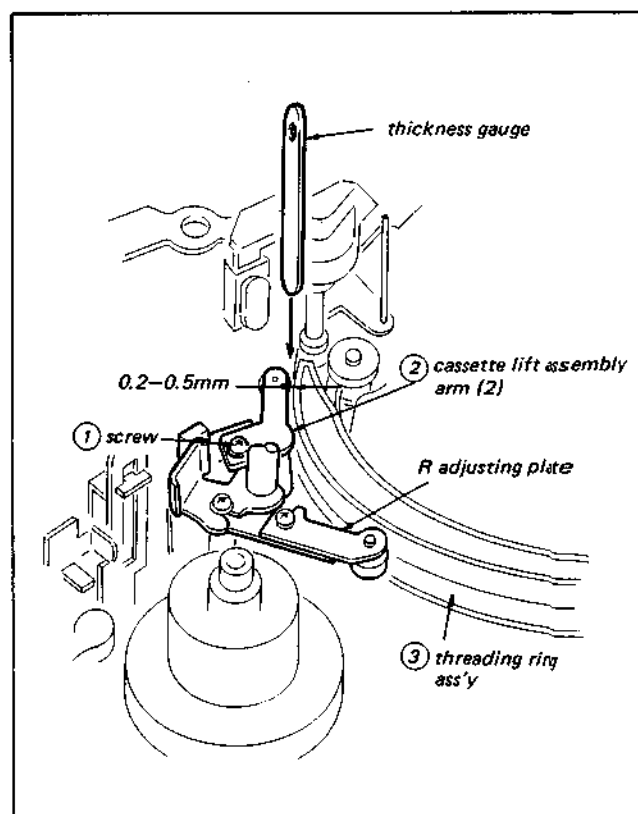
Clearance adjustment of cassette lift assembly arm
